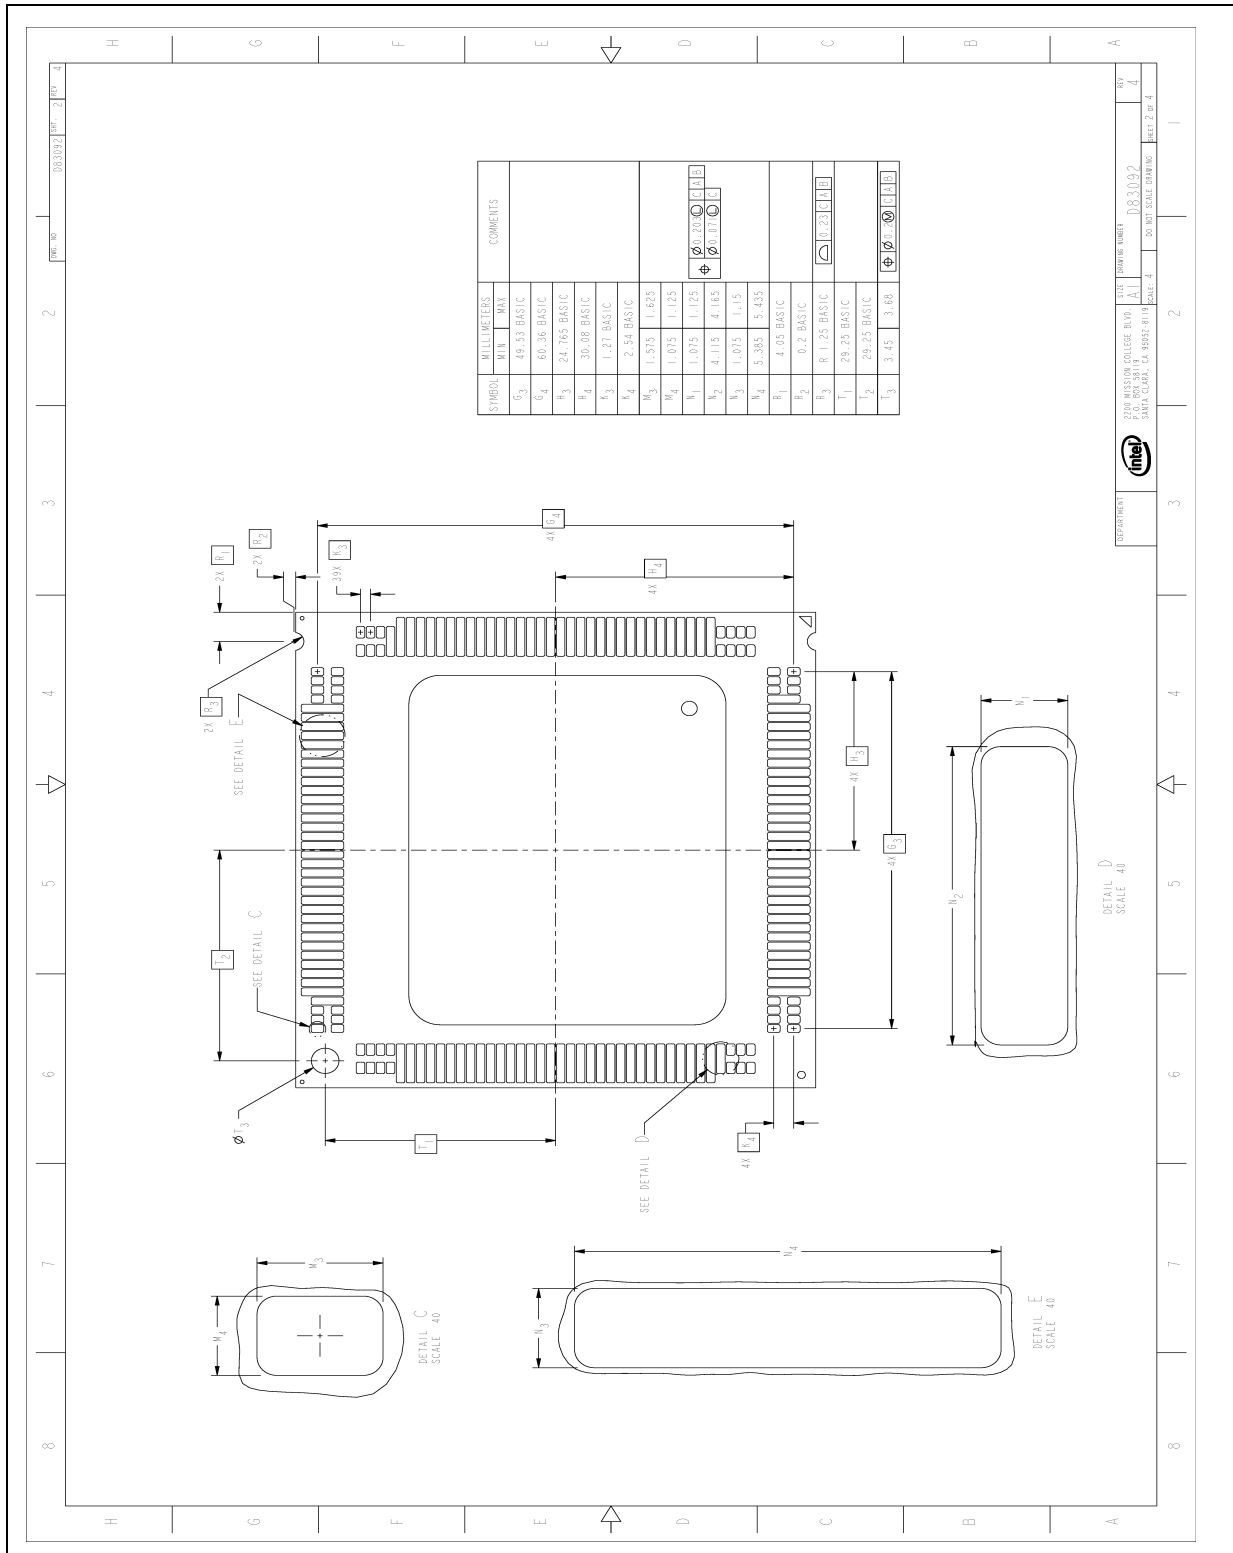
Intel® Itanium® Processor 9300 Series Processor Package Drawing (Sheet 2 of 4)
